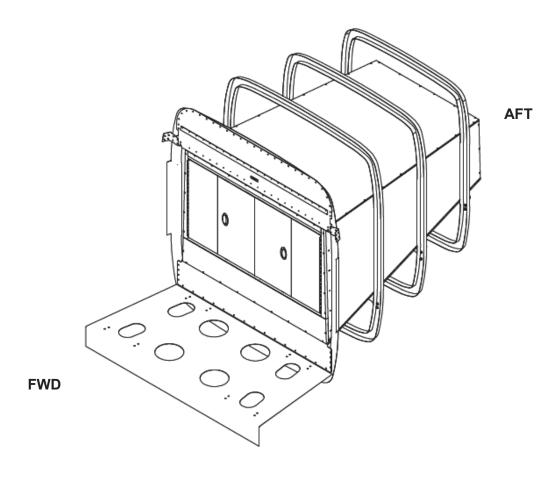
Extended Baggage Configuration -03 (see drawing 1008423)
